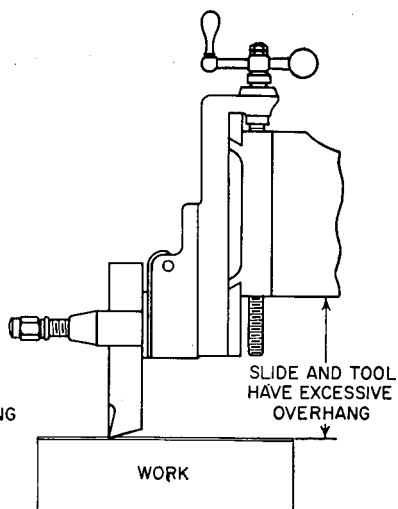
An incorrect method of clamping a tool. (*The Cincinnati Shaper Company*)
